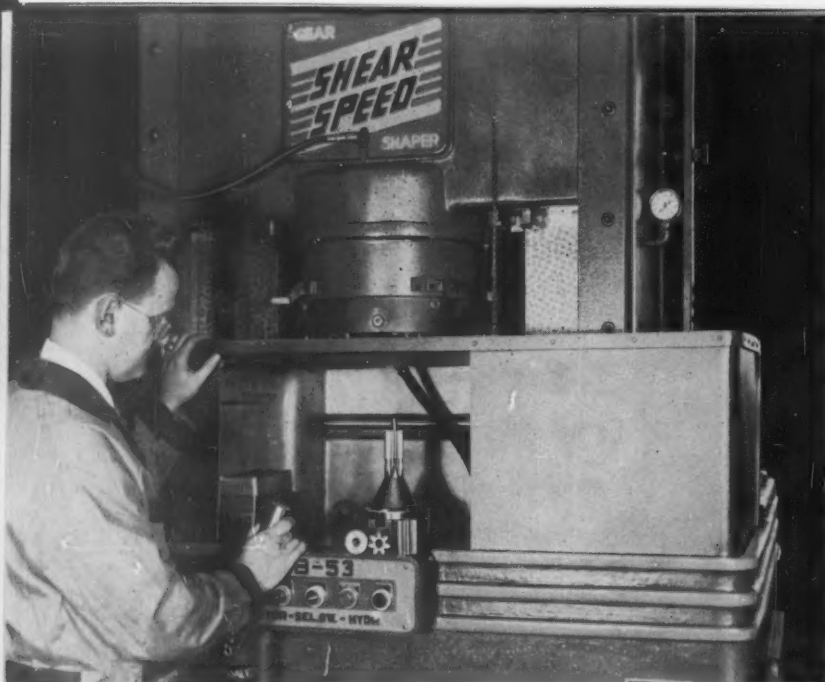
Two gear blanks are pneumatically clamped and reciprocated vertically while being shaped by a set of seven cutter blades which are fed radially inward.
